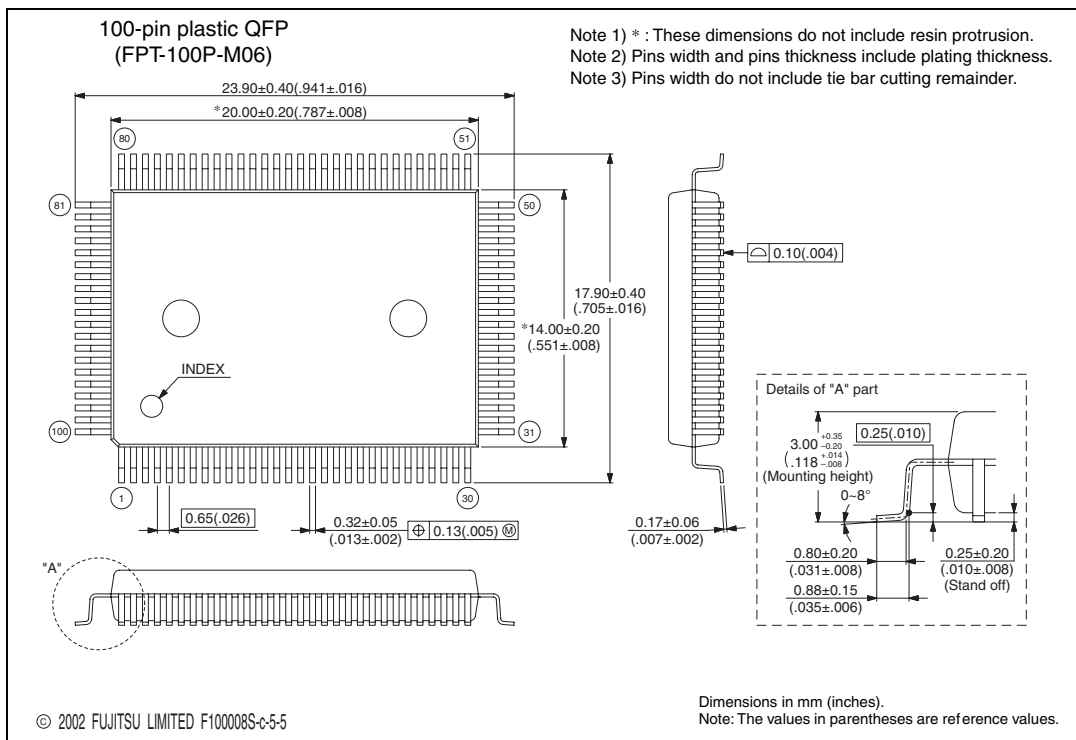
shows the external dimensions of the QFP-100 package and Figure 1.4-2 shows those of the LQFP-100 package.
